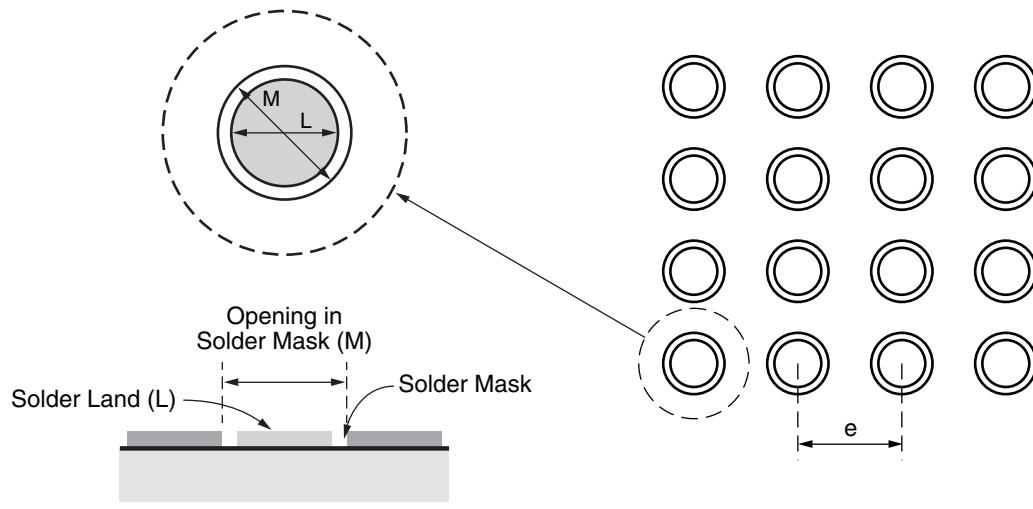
Suggested Board Layout of Soldered Pads for BGA Packages
